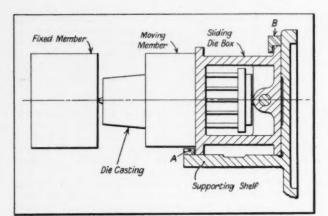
A Vertical Section Through a Tool which is Arranged to Slide Laterally
